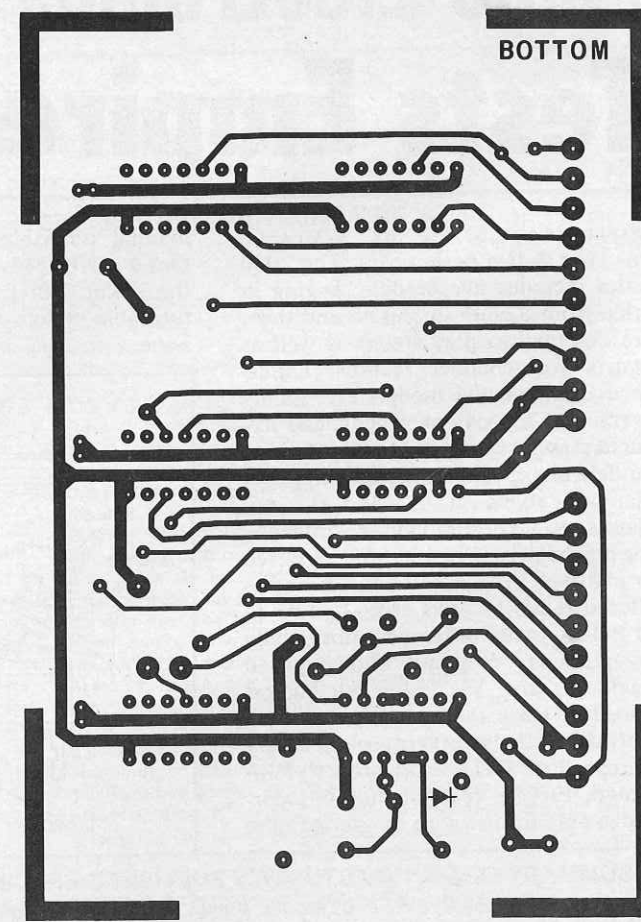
FOIL PATTERN for foil side of double-sided board shown full size.
